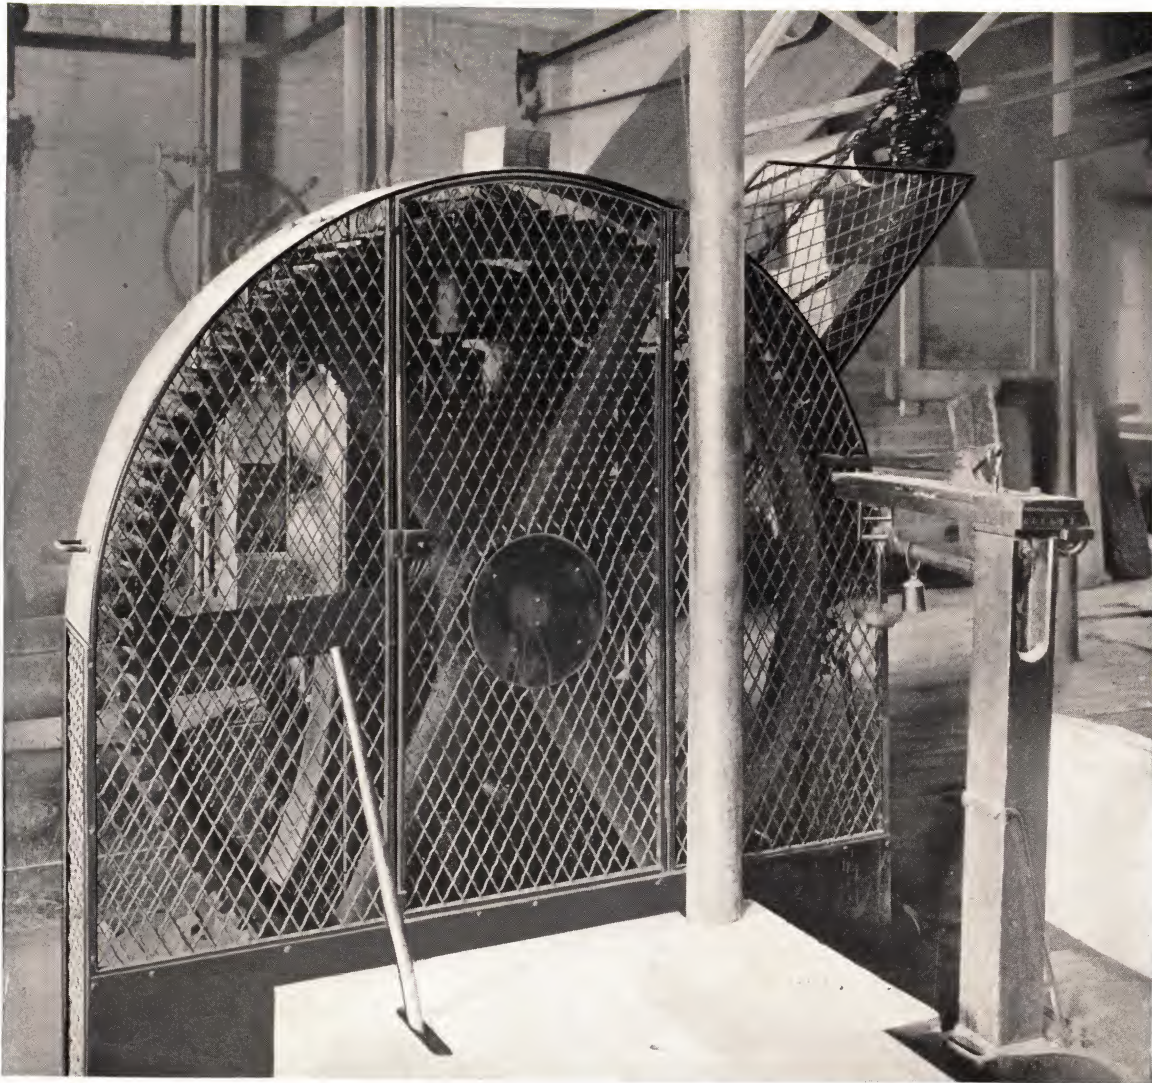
This is one of the many machines in a number of the largest rubber mills in the country which we have provided with our machinery guards. Without these guards this big powerful machine would be a continual source of danger to all working near it. The designing and making of effective machinery guards requires a knowledge and skill which can only be acquired through long experience. We have been making machinery guards for over 50 years, and the benefit of our experience is at the disposal of our customers. Our special machinery guard catalog shows many types of standard and special guards.
